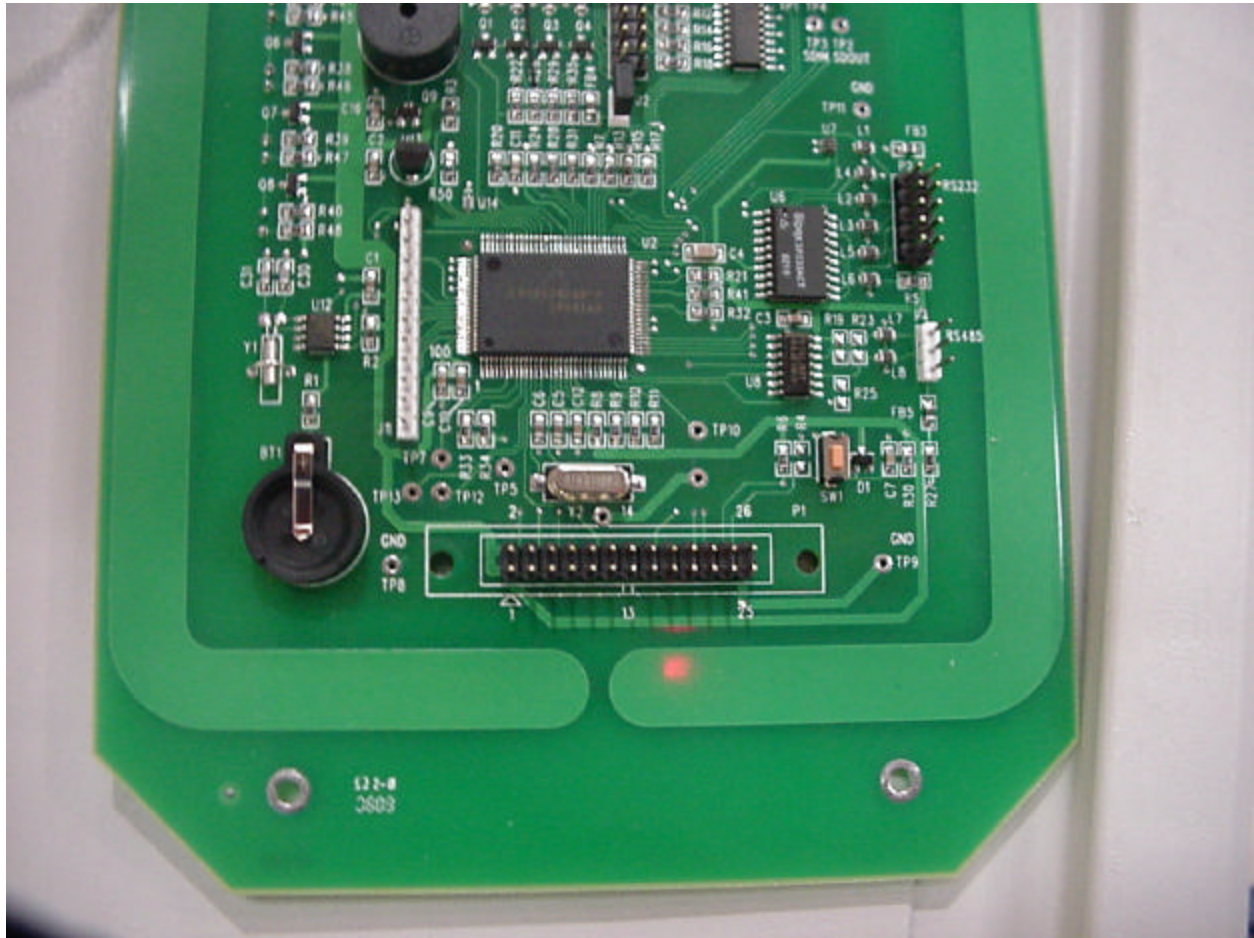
Photo of the Bottom for Side 1 of the Circuit Board
